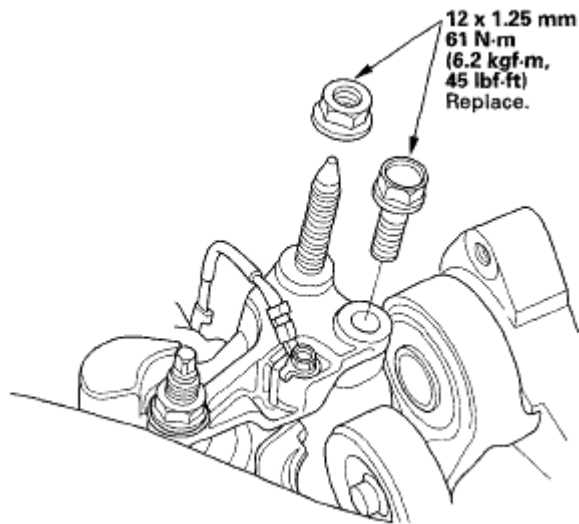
Identifying Upper Engine Mount Bracket Bolt And Nut
